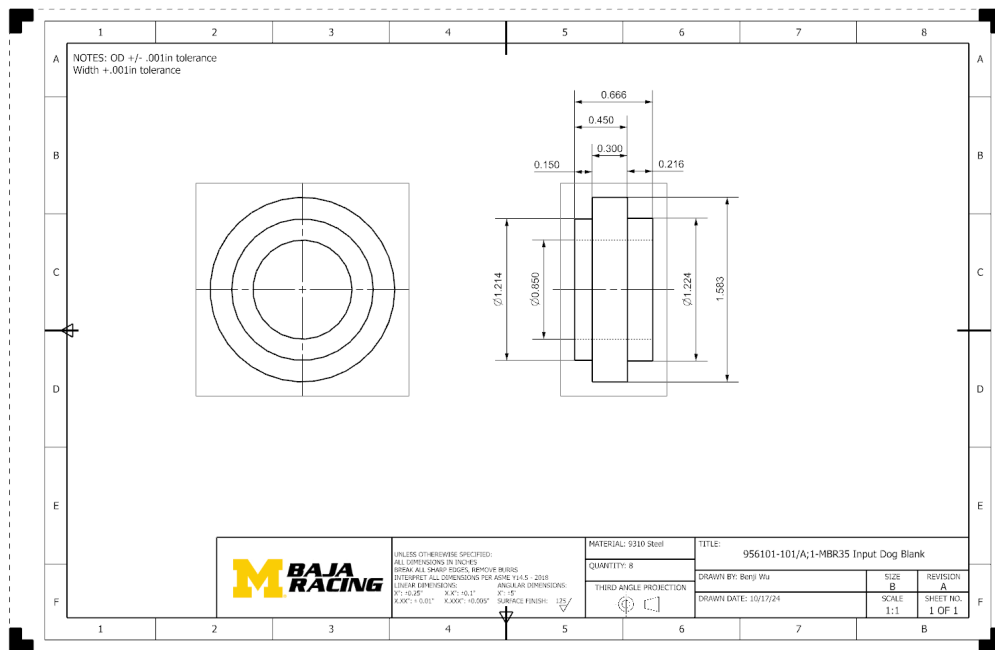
Part drawing of the input gear blank to be machined of the TL-1 CNC lathe with all critical dimensions and tolerances called out.
